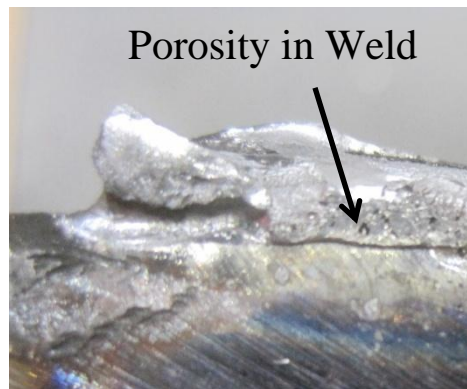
Porosity in Cross Section of Fillet Weld (Example)
